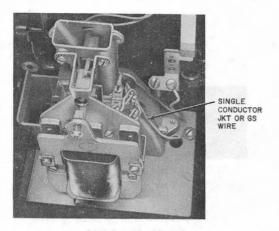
Method of Grounding Coin Collector Housing Assembly, Open Type Installation
